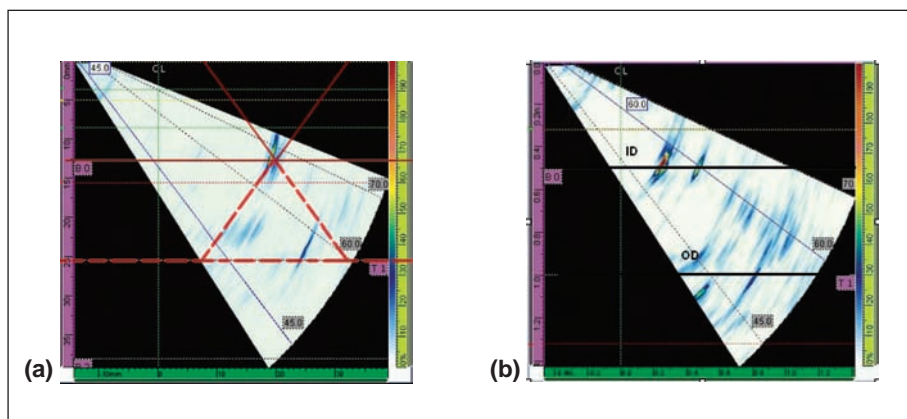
Images of the 13 mm (0.5 in.) thick plate: (a) root; (b) inner diameter crack indication on the left, just ahead of the root. (Instrument: 5 MHz, 9.6 mm [0.38 in.] aperture, 16-element probe.)
